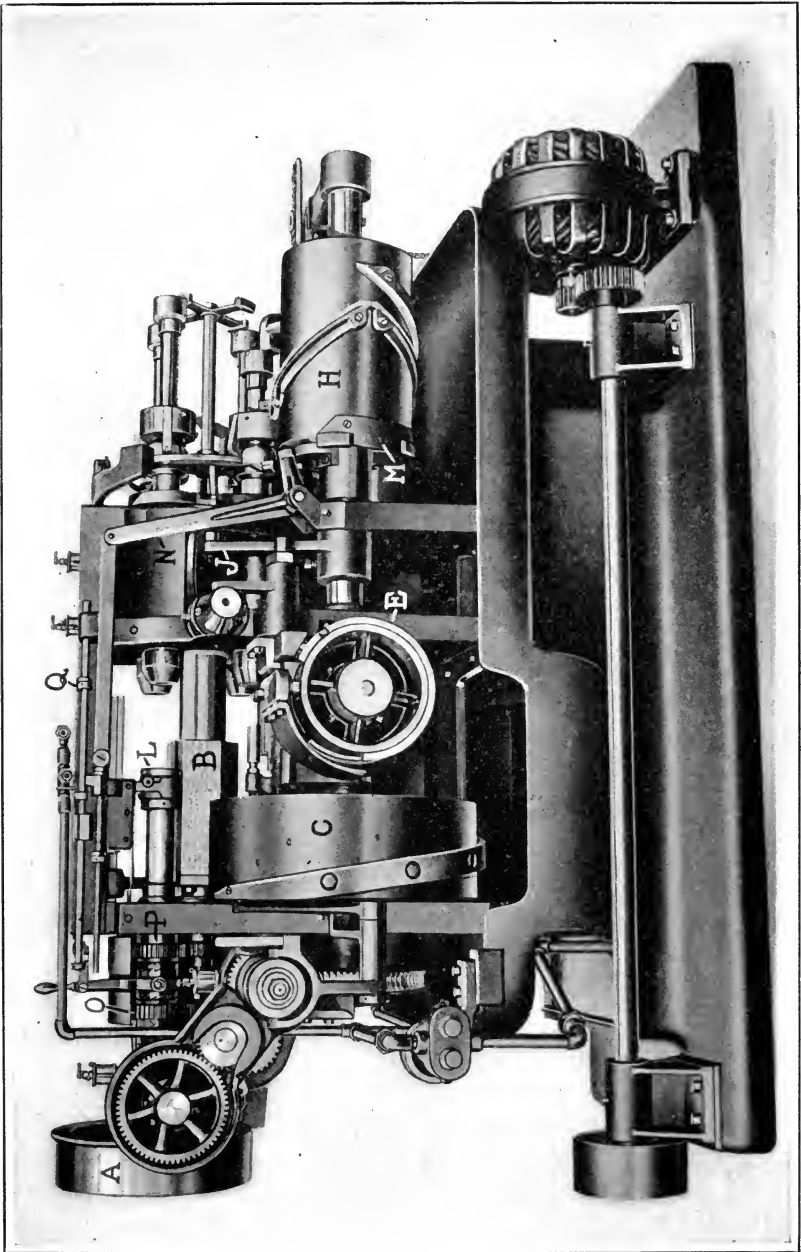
Rear View of Gridley Multiple-spindle Automatic equipped with Motor Drive
